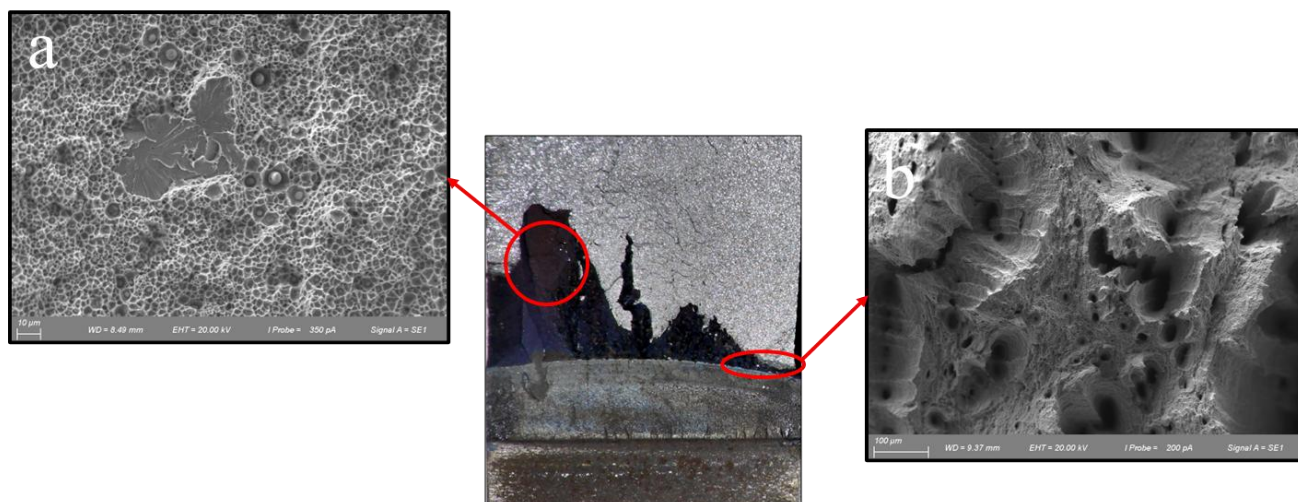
(a) FZ1 NP Air tested specimen fracture surface; (b) fine dimples in FZ region; (c) coarse dimples in HAZ region.
